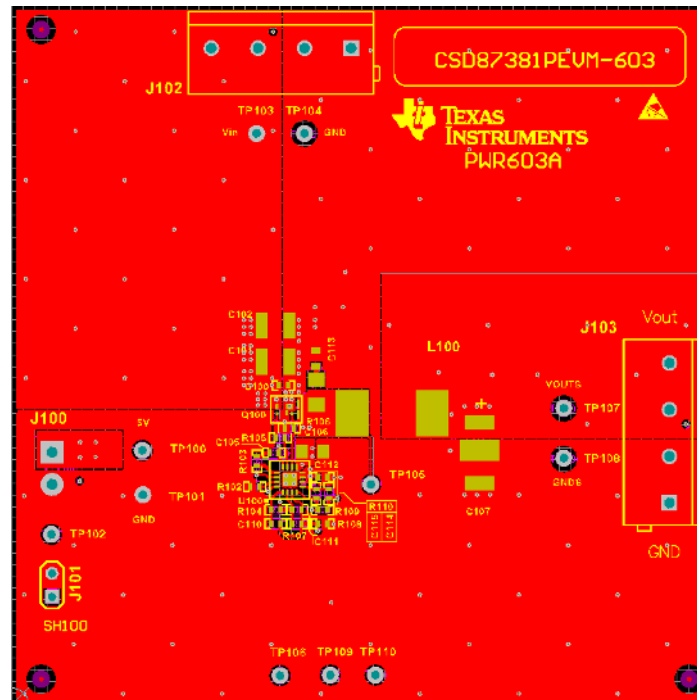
CSD87381PEVM-603 Top Layer Assembly Drawing (Top View)
